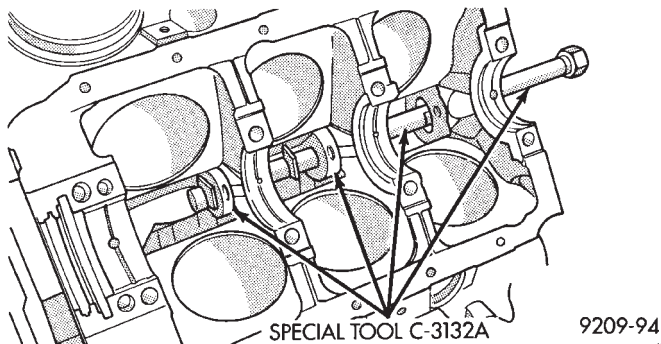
Removed Installation of Camshaft Bearings with Tool C-3132-A—Typical
